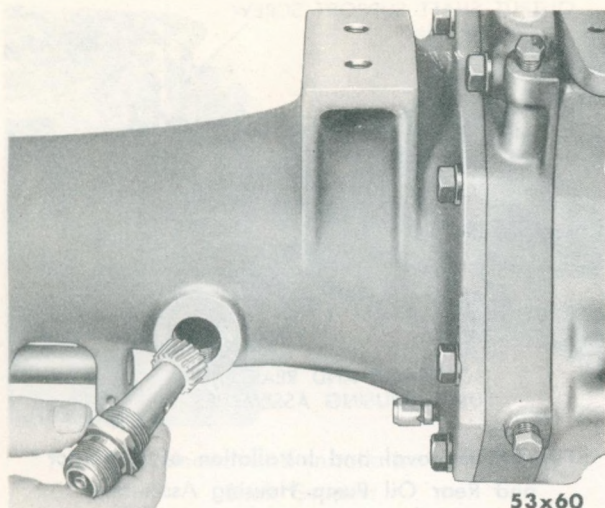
Removal and Installation of Speedometer Drive Pinion Assembly
